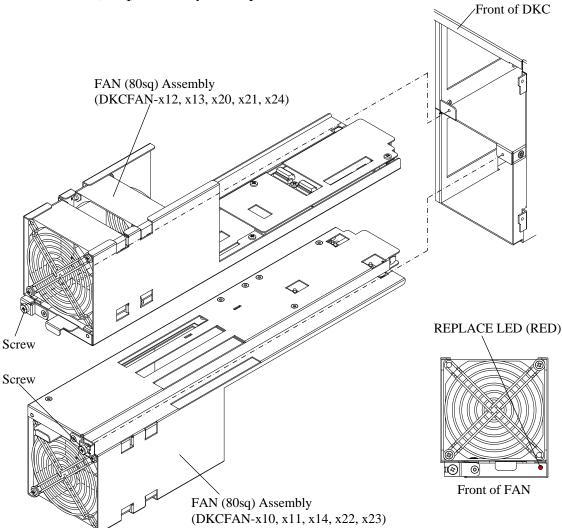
Replacement of FAN (80sq) Assembly
